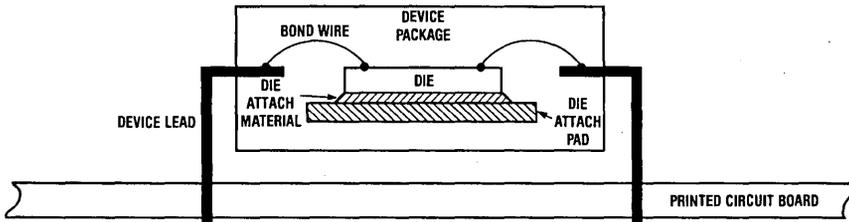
Integrated Circuit Soldered Into a Printed Circuit Board (Cross-Sectional View)
